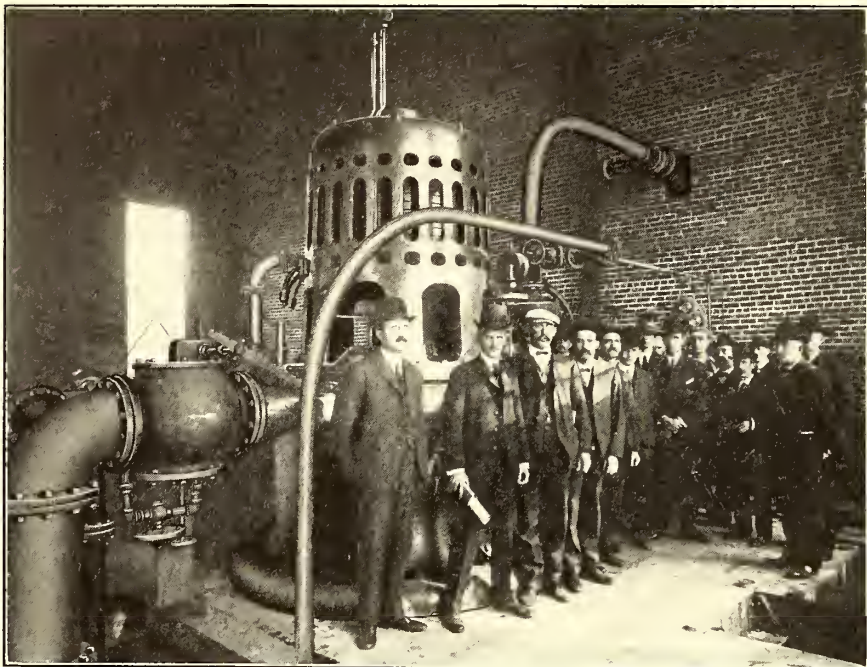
THE 500-KW STEAM TURBINE IN COURSE OF ERECTION
